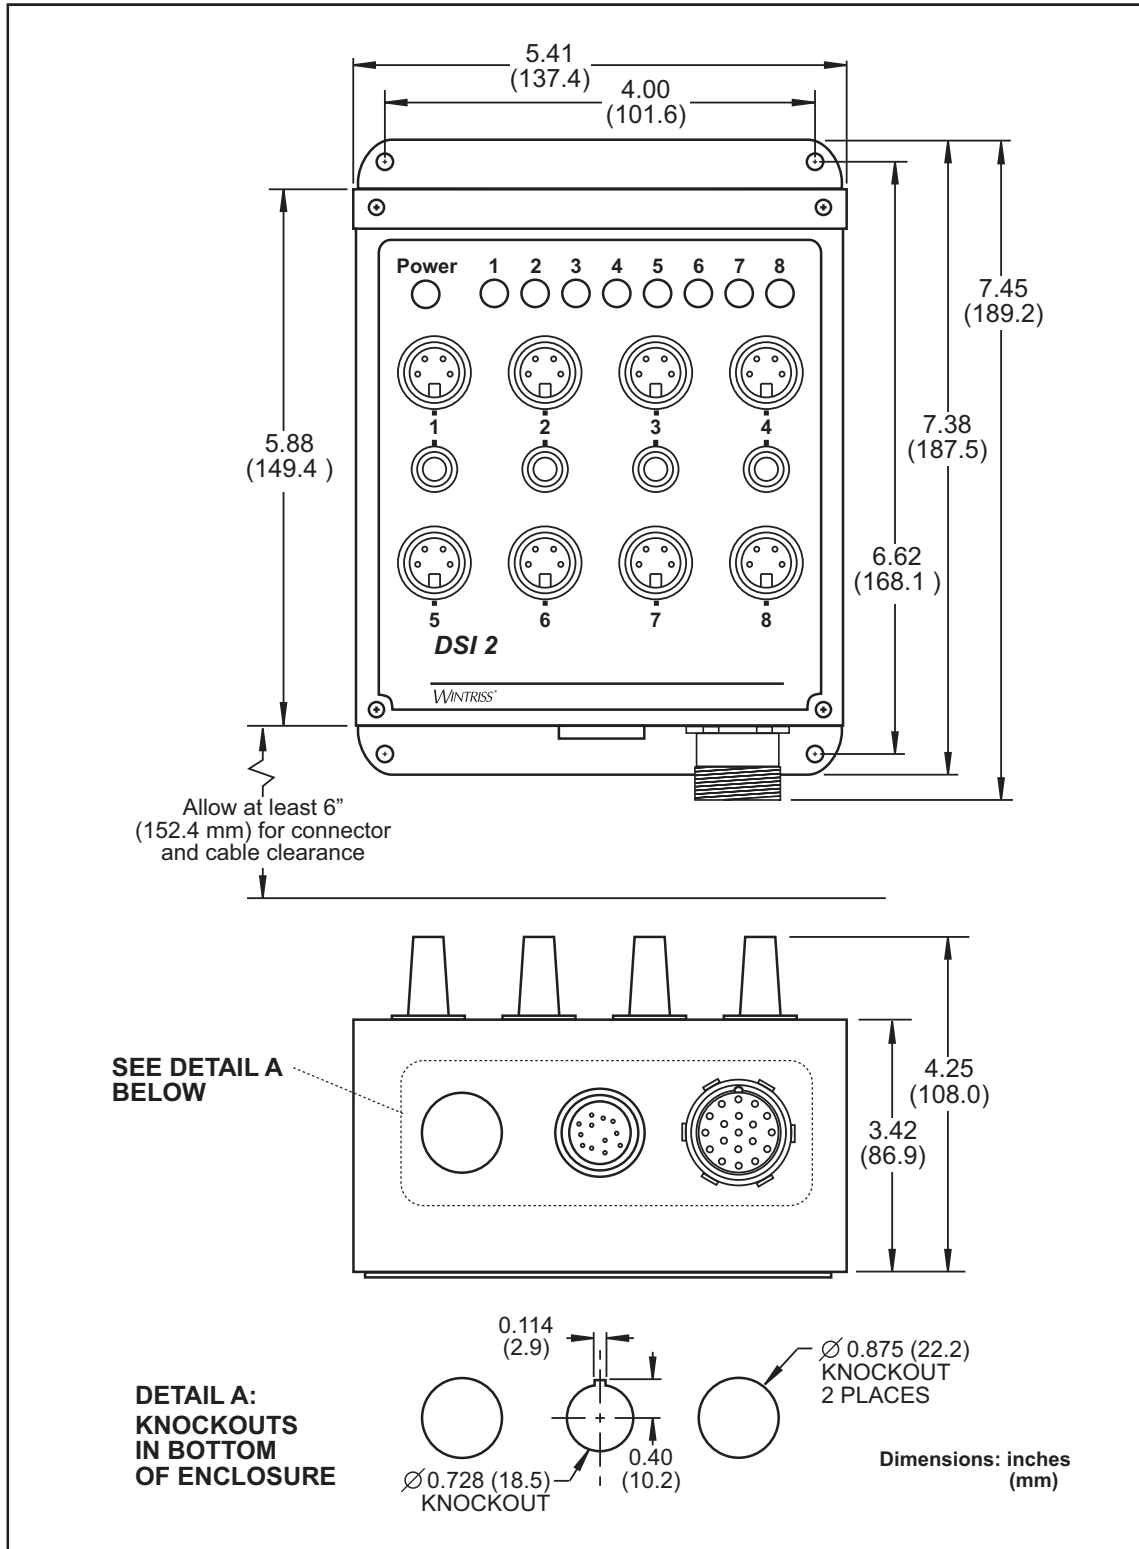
DSI 2 8-Input Enclosure: Mounting Dimensions
